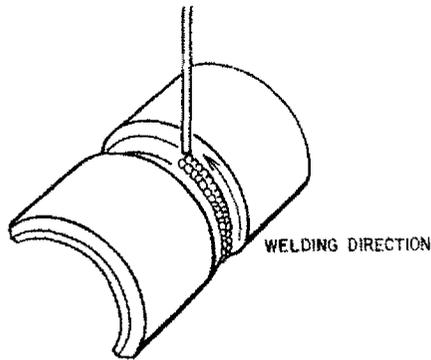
Stringer beads deposited when welding heavy-wall pipe in the 6G, or similar, position.
